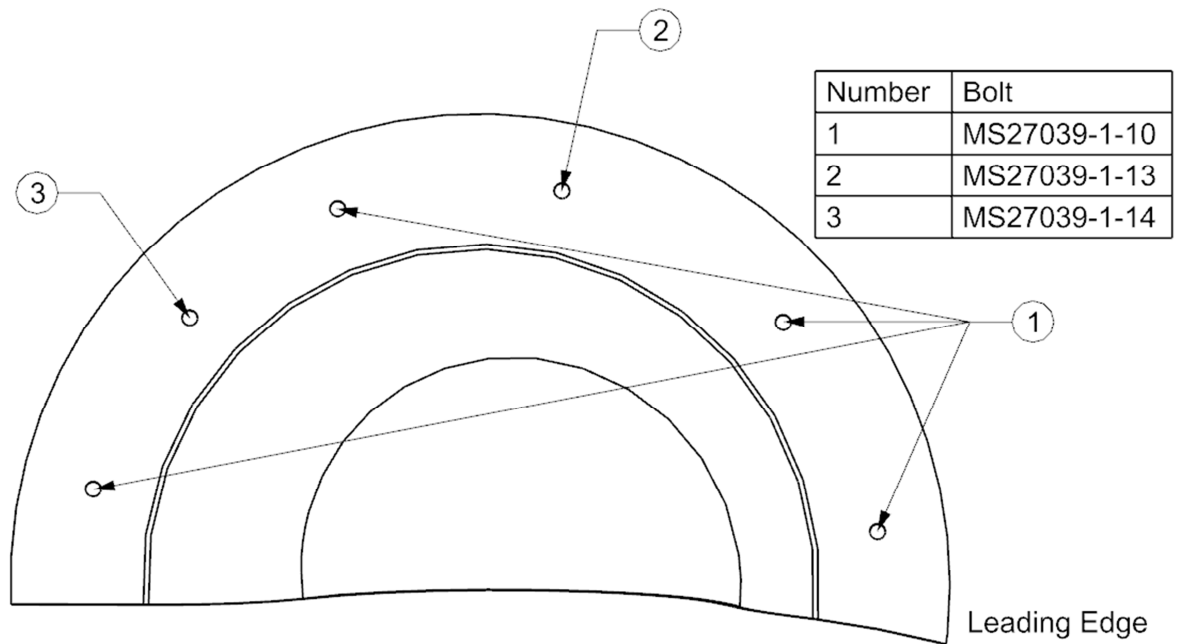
Center Wing Pylon Forward Lug Cover Fastener Placement
